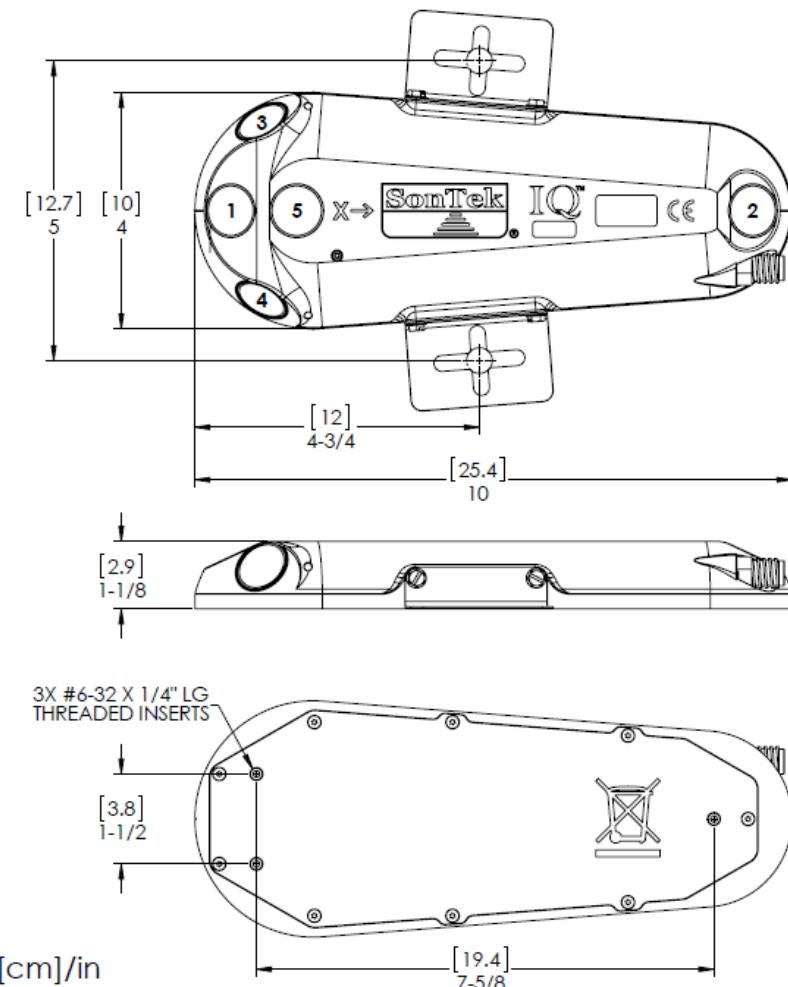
Technical Drawing of the SonTek-IQ and IQ Plus with Mounting Options
